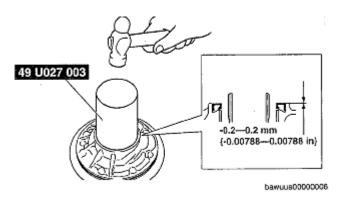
Installing Oil Seal To Oil Pump Body Using Special Tool Courtesy of MAZDA MOTORS CORP.
